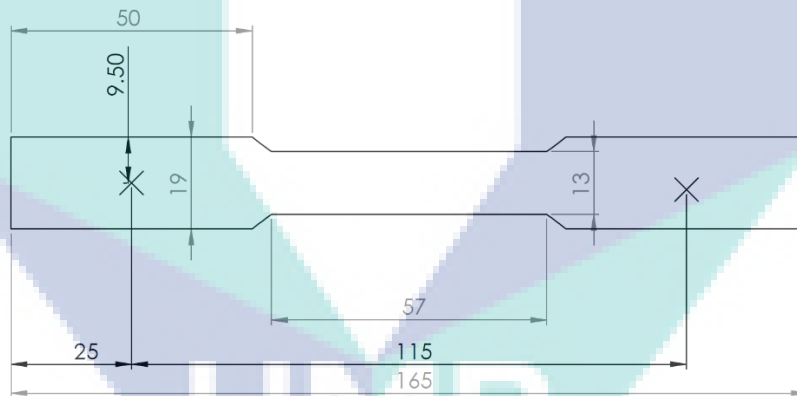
Tensile Test Specimen Dimensions for Z-ABS Material
